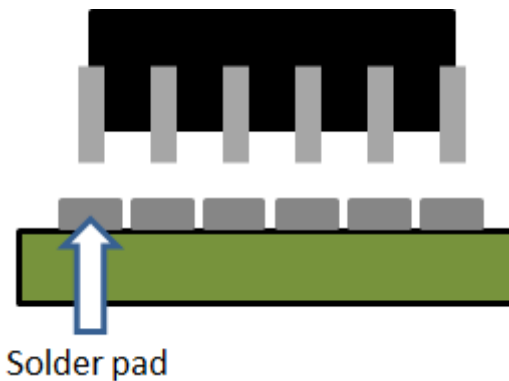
Example of a solder pad mounting arrangement: component, solder pads, and circuit board surface
